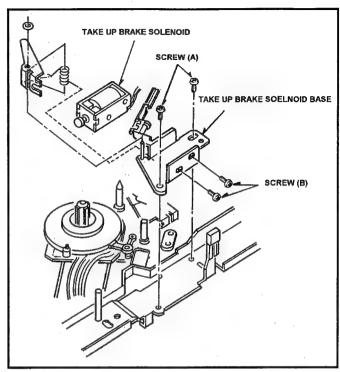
Removal of Take Up Brake Solenoid
